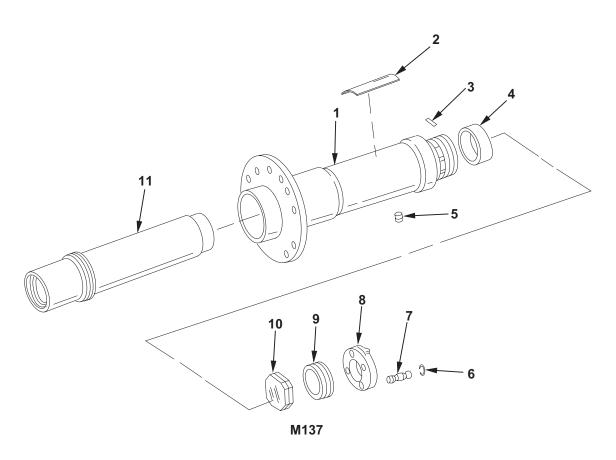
Objective and Reticle Assembly, M137, 11741200, and Objective and Reticle Assembly, M137A2/M137A3, 12961437 (Sheet 1 of 2).
